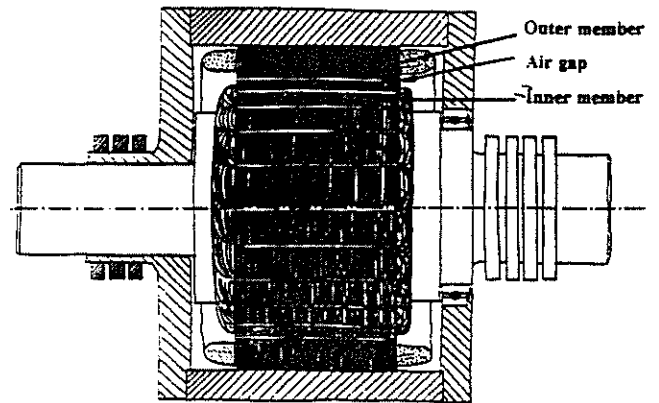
Sketch cross sectional drawing showing the construction of the electromagnetic unit.
